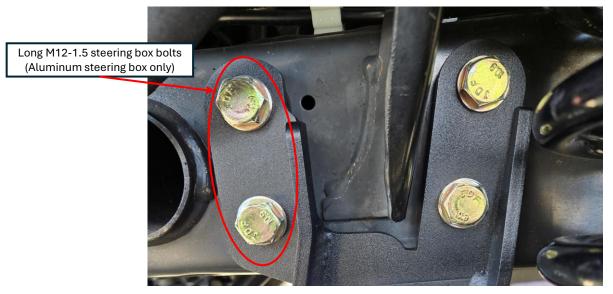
New M12-1.50 steering box bolts installed (hand tight)
